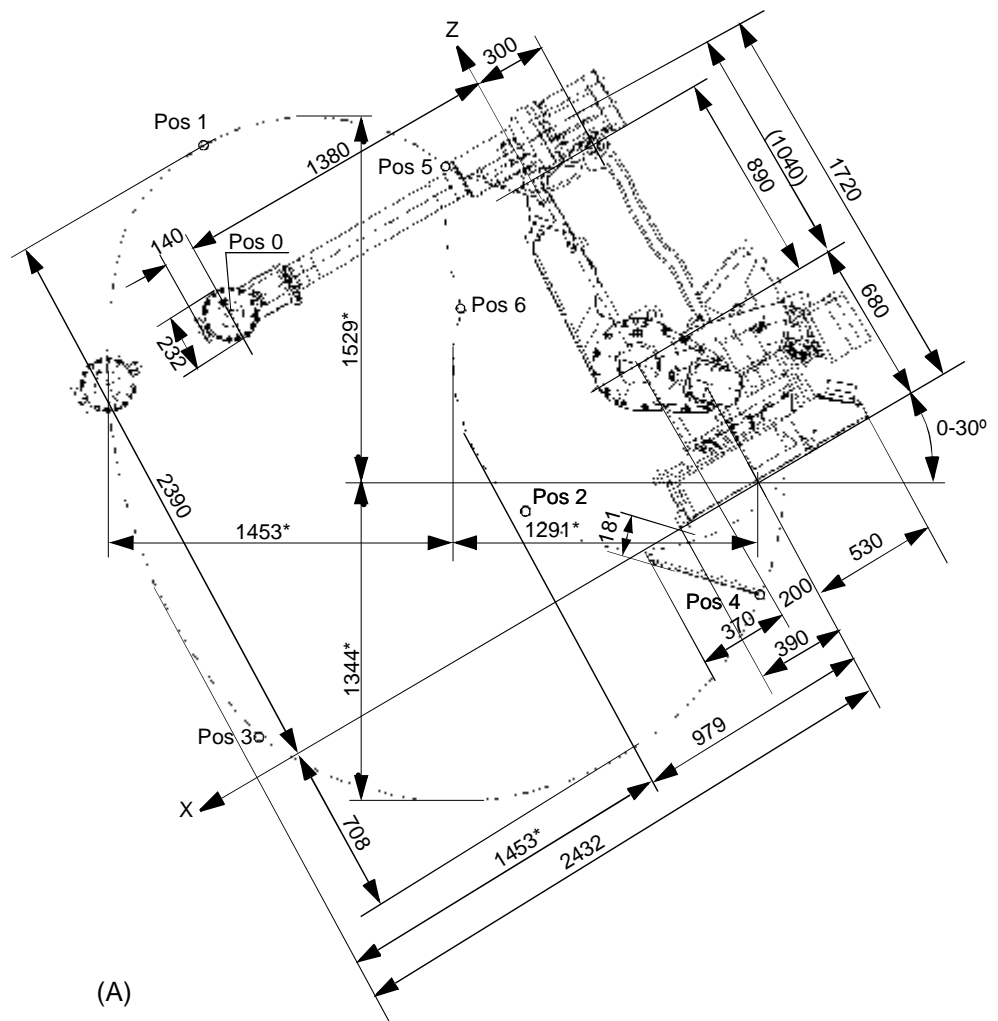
The extreme positions of the robot arm IRB 4400/S (dimensions in mm).
